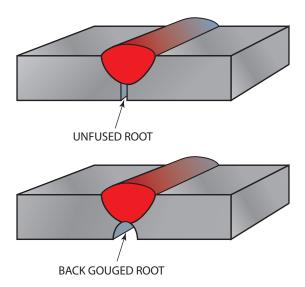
Back gouging the root of a weld made in thick metal can ensure that a weld with 100% joint fusion can be made.
